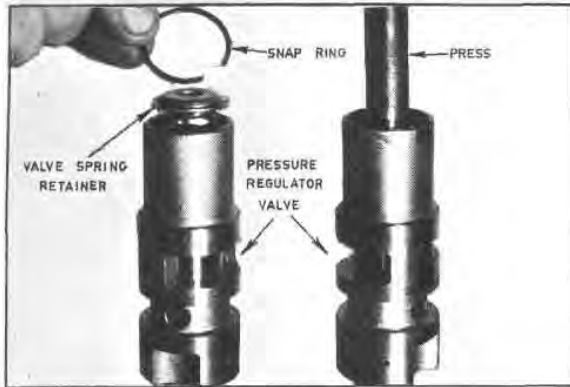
Valve Spring Depressed and Snap Ring Removed
